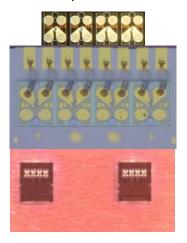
Results of hybrid microassembly of dies on lead frame with NXP high-speed die bonding machine.
